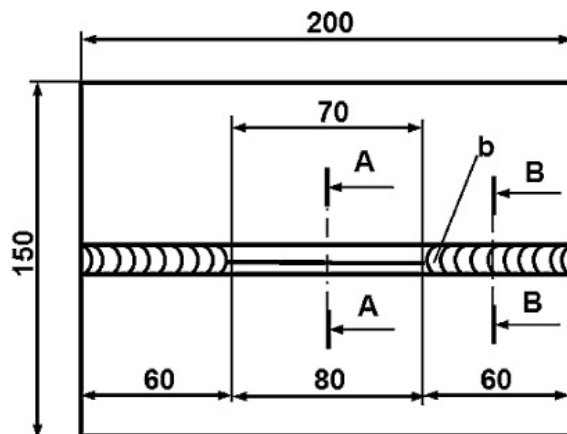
Dimesions of test specimen (All dimensions are in mm)
